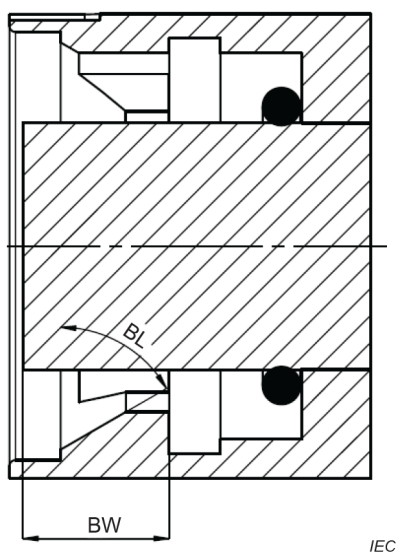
Side view of the female side of the push-pull housing for X-coding
